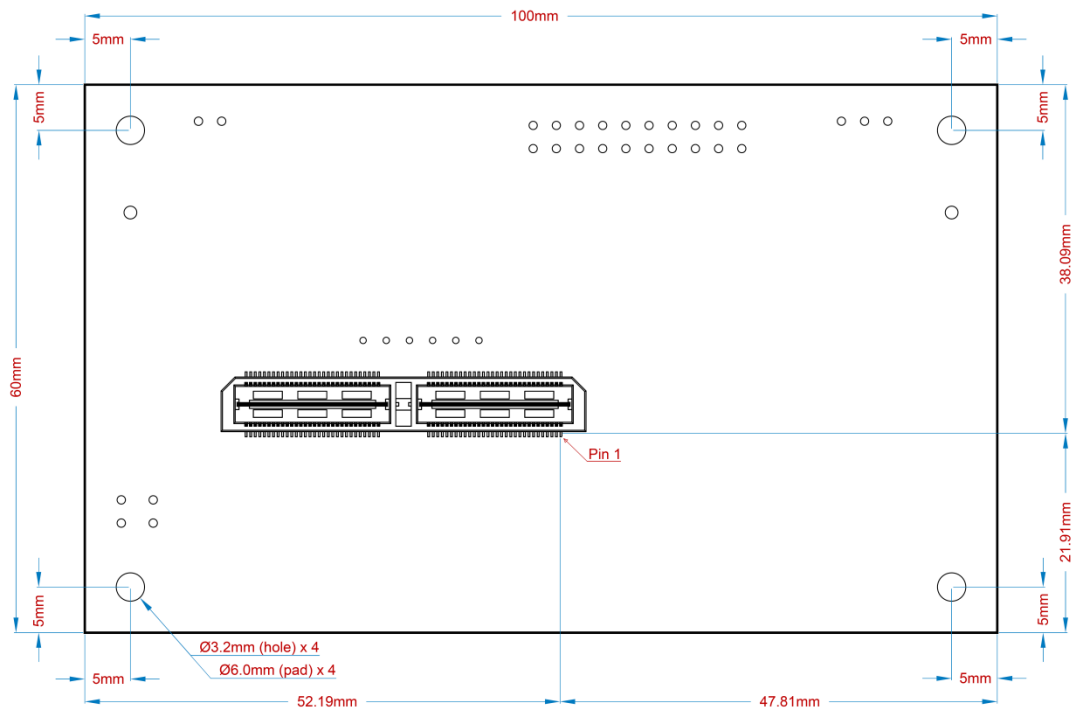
Apalis TK1 Mezzanine Board Mechanical Drawing – Bottom Side
